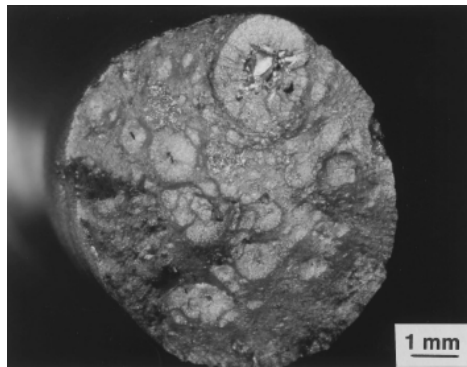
Fish eyes on the fracture surface (Woodtli, J., R. Kieselbach, 1999).
